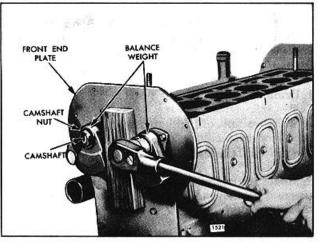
Loosening Nut on Camshaft or Balance Shaft
